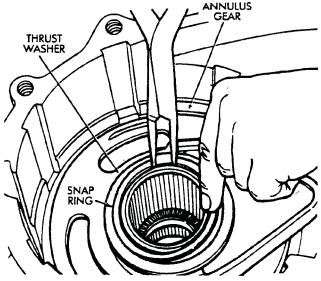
Remove Annulus Gear Snap Ring And Thrust Washer
